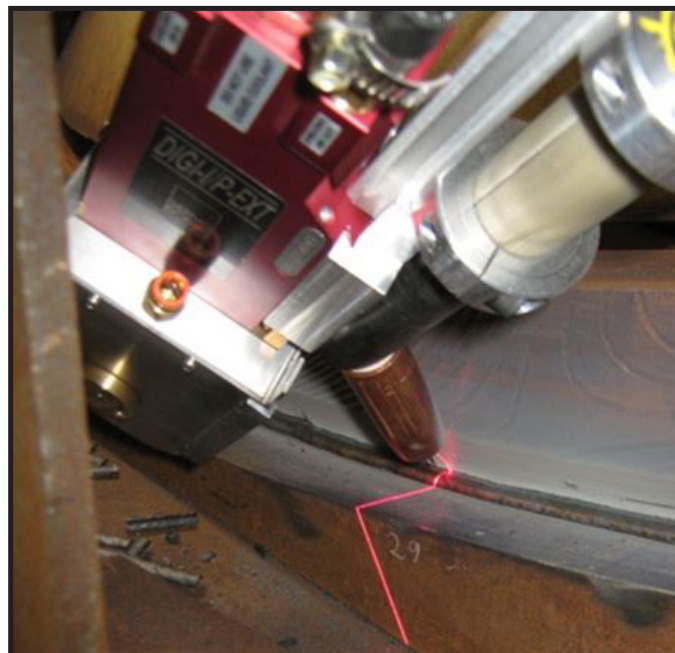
Successive laser scans of a multi-pass weld to measure weld geometry, allowing adaptation of current and future weld pass parameters
